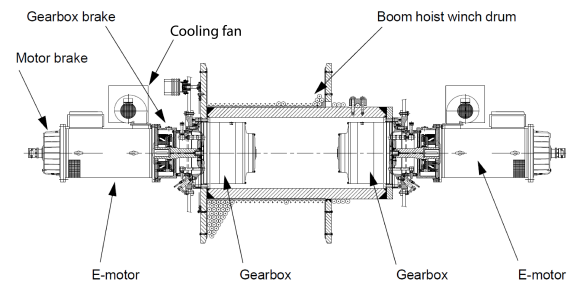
General assembly of the drivetrain of a winch including the drum, E-motors, gearboxes, brakes and cooling fans.
